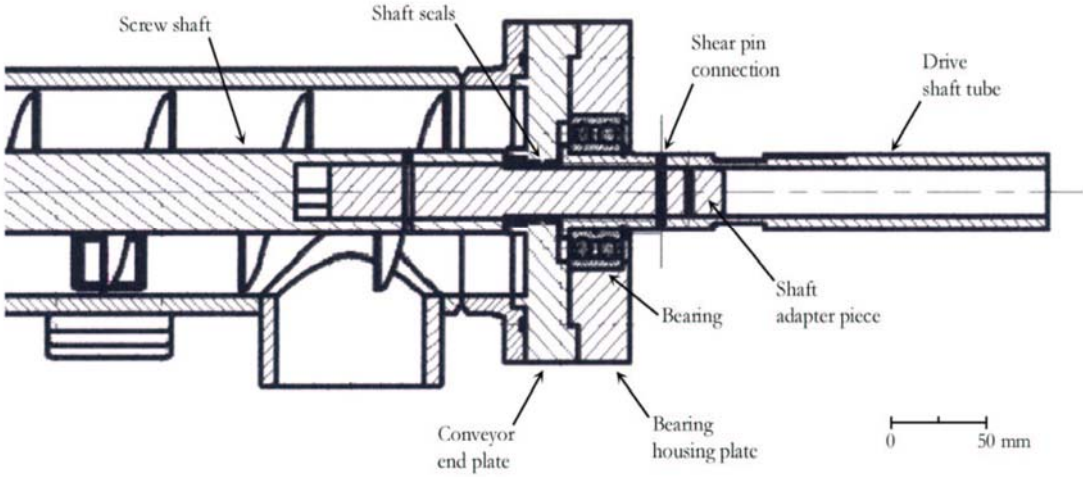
Merritt’s drive shaft layout (Merritt, 2004).
